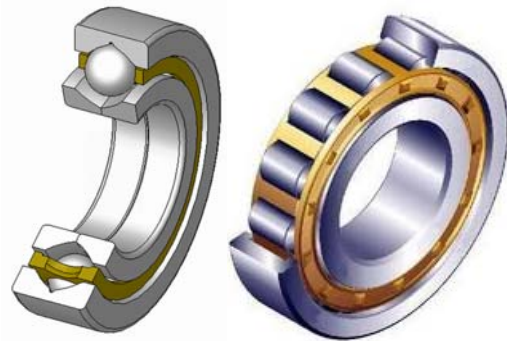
Typical Aircraft Engine Bearing Geometry. Split Inner Ring Ball Bearing (left) and Roller Bearing (right)
